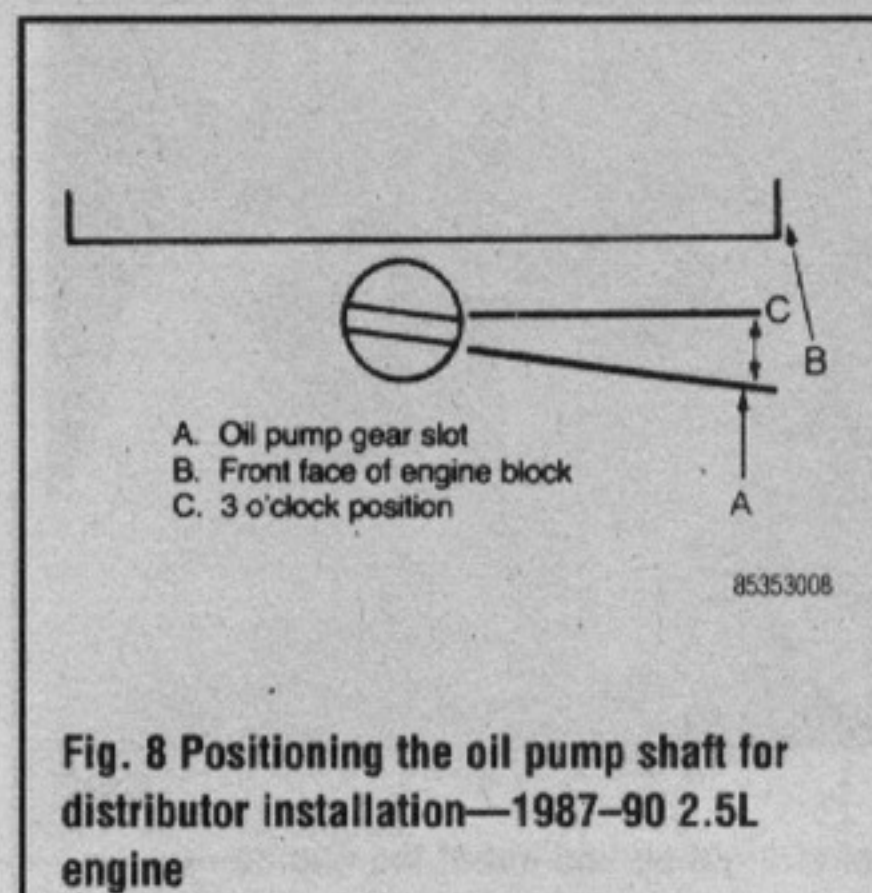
Positioning the oil pump shaft for distributor installation—1987-90 2.5L engine
